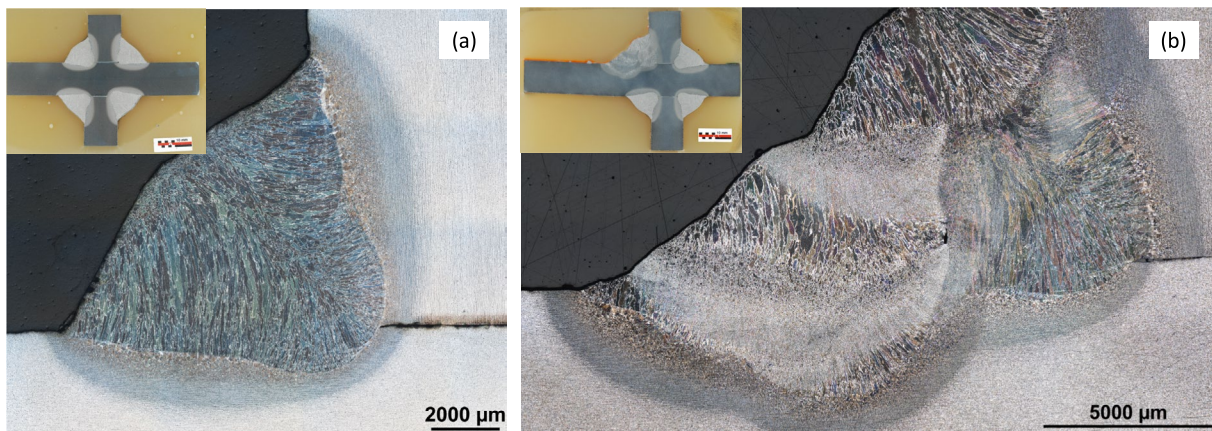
Cross sections of the specimen in as-welded condition (a) and after a single-sided weld repair (1S) (b)
